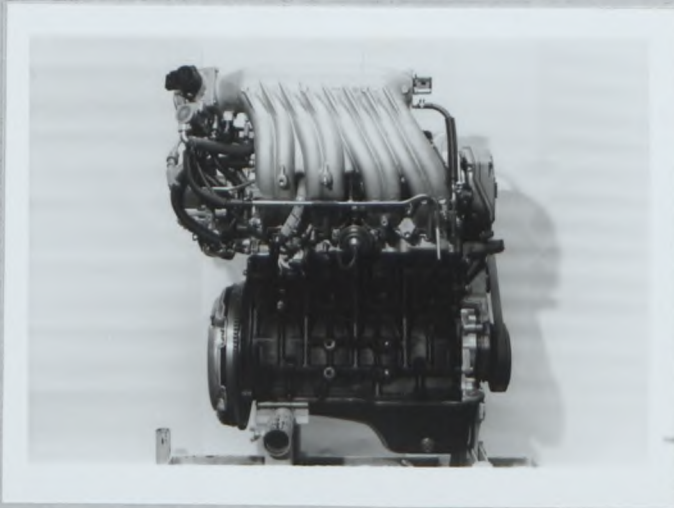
RIGHT HAND VIEW OF DISMOUNTED ENGINE
